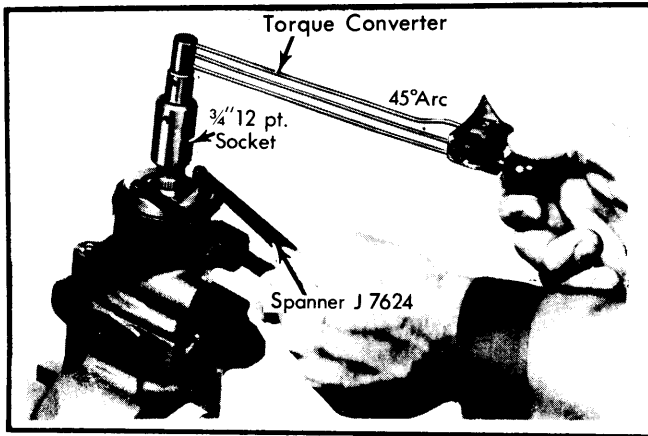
Thrust Bearing Preload Adjustment (Large Gear Shown)
